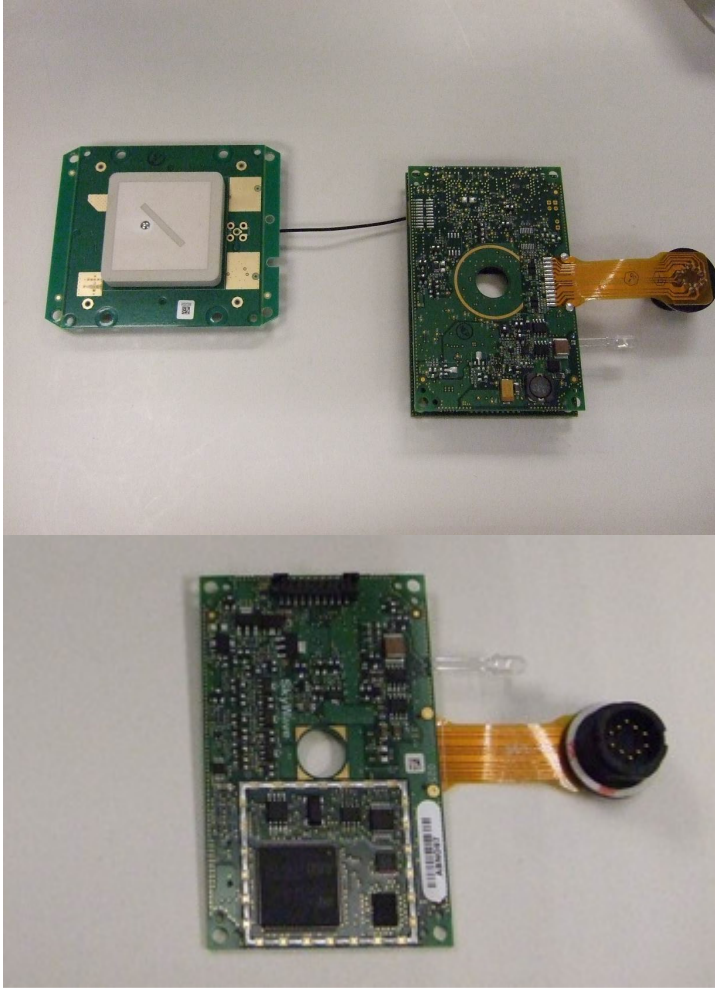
Application Card Top and Bottom View (Shields Removed)
